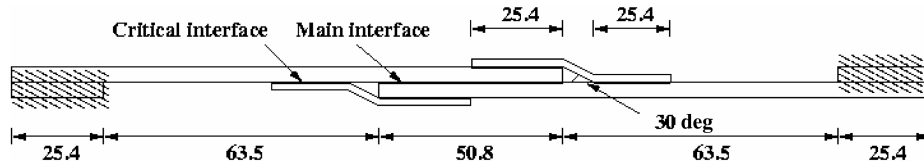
Geometry and dimensions of the single-lap joint with attachment.
